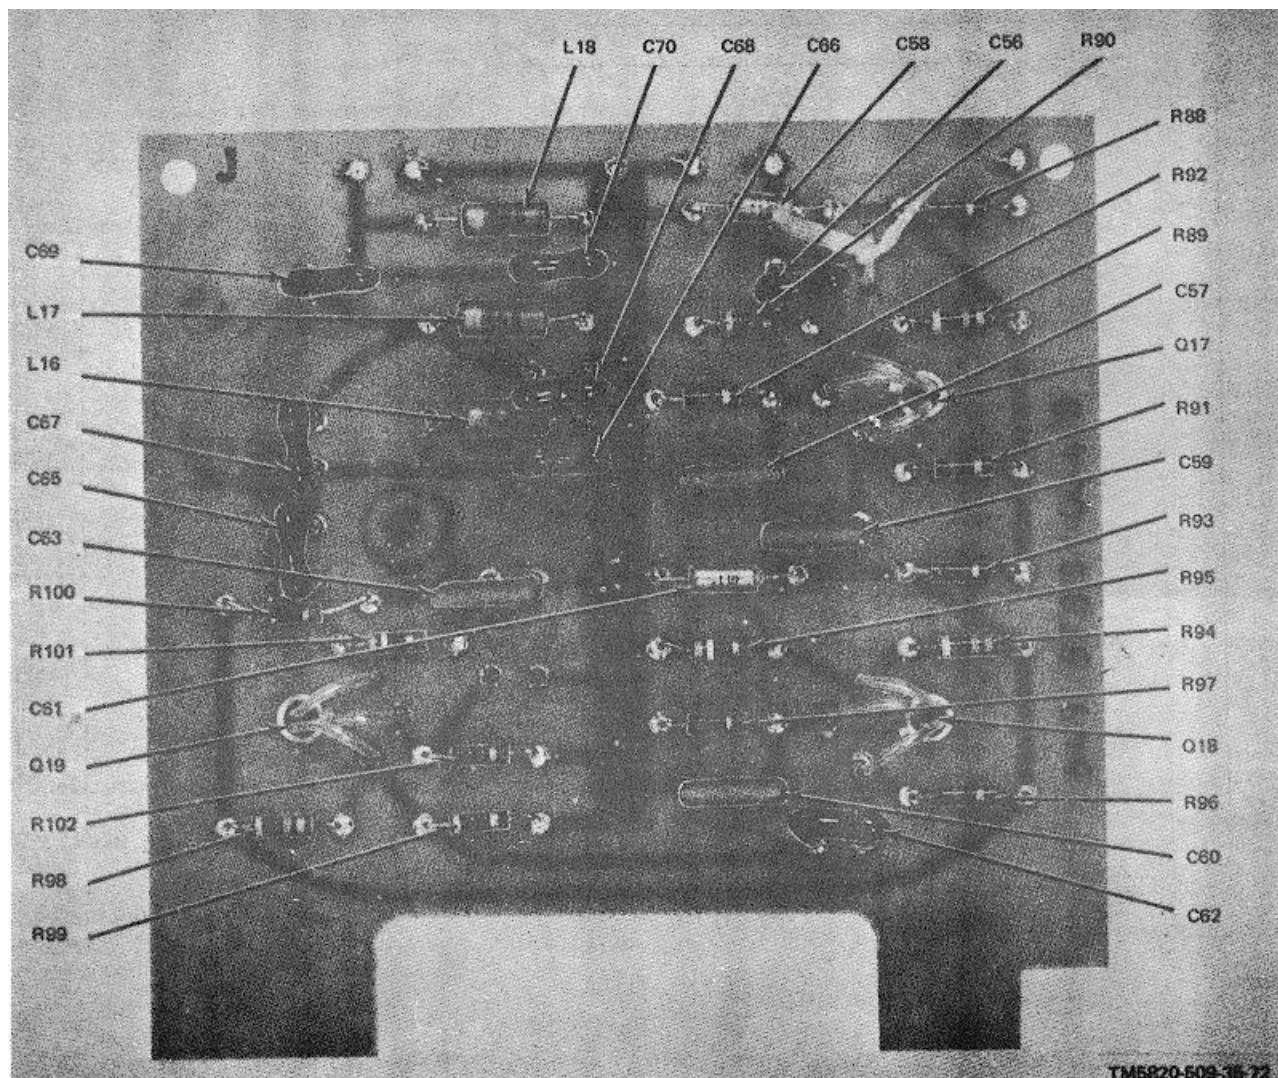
Oscillator Control C-4311/PRC 47 (A8A7), Card Assembly E4.
